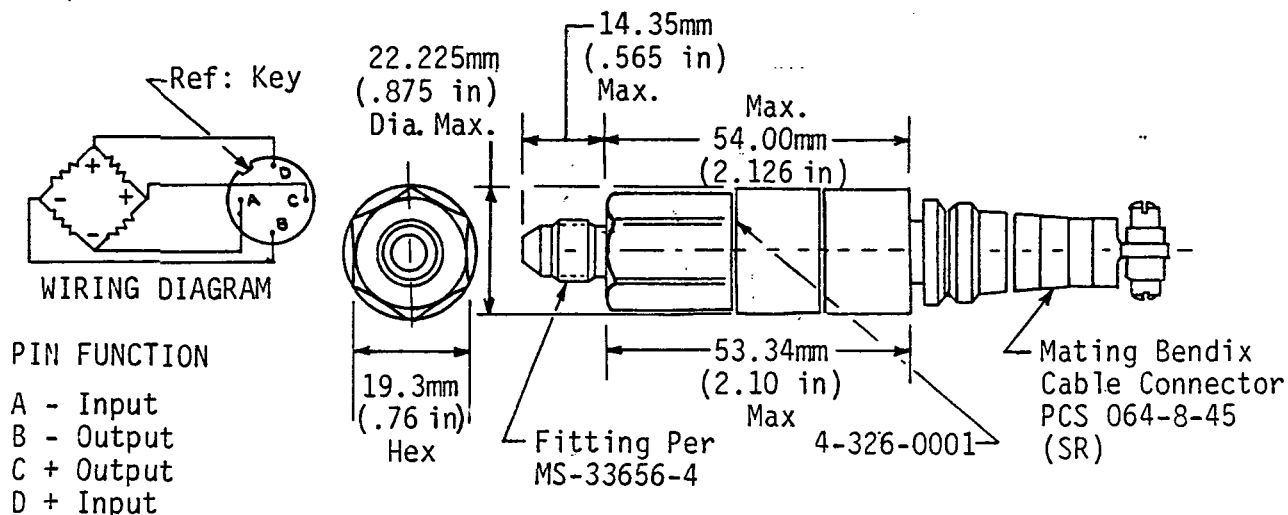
BELL & HOWELL TYPE 4-326-0001 PRESSURE TRANSDUCER OUTLINE DIMENSIONS
